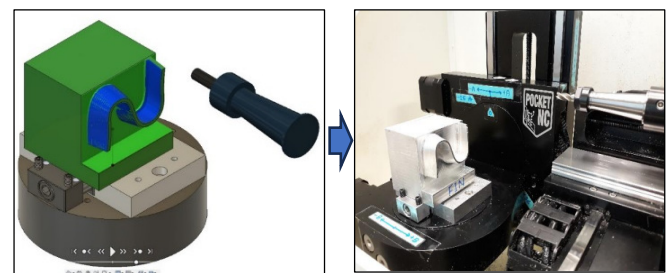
CAD/CAM of an S-shaped part milled on a mini five-axis machine tool.
